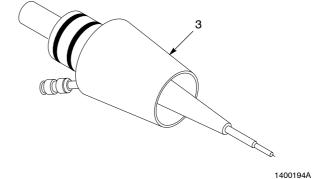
Versa-Spray II Control Unit Gun Air Kit
